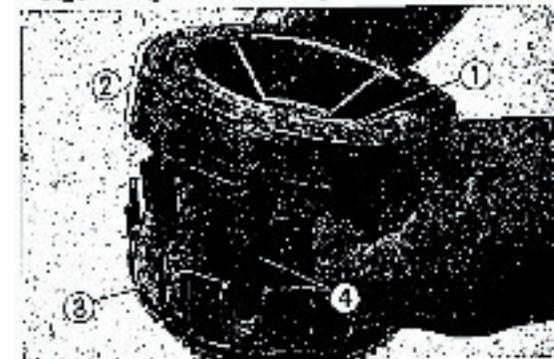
(1) Clutch center (2) Friction discs and plates (3) Clutch outer (4) 25mm collar
